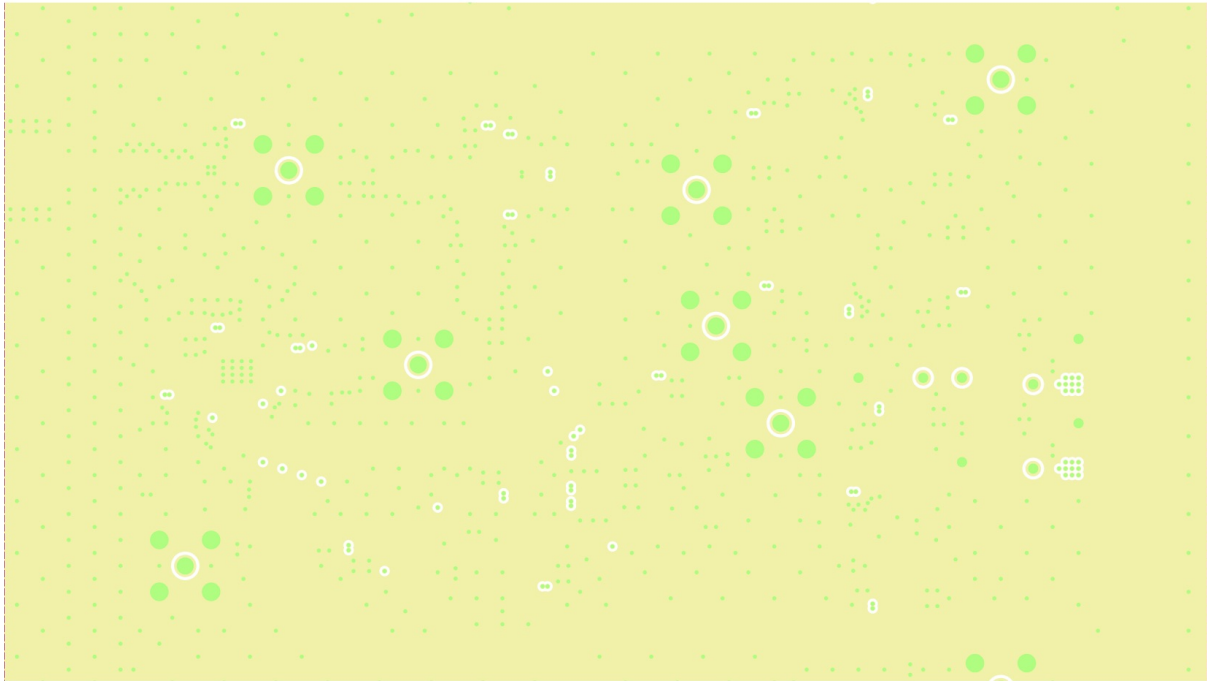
DLL-HPC received signal beamformer PCB layout for element 1 inner layer 1
